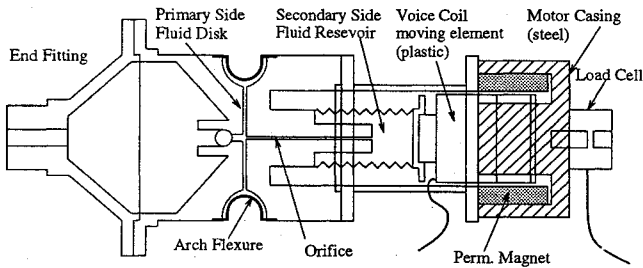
Assembly drawing of small voice coil AD-strut, total length 12 cm and total mass 220 g.
